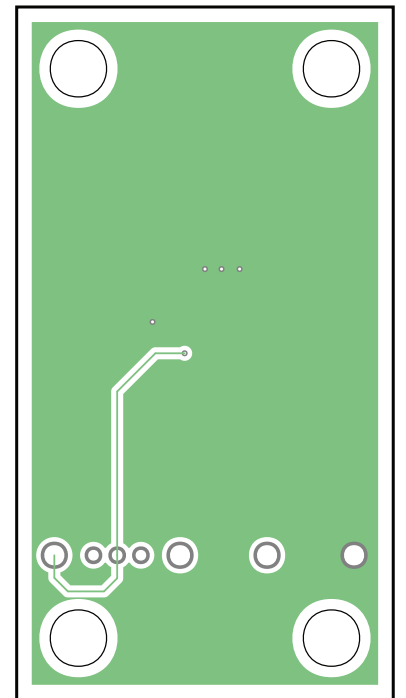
EVAL-ADPL21610-AZ PCB Layout—Internal 3
